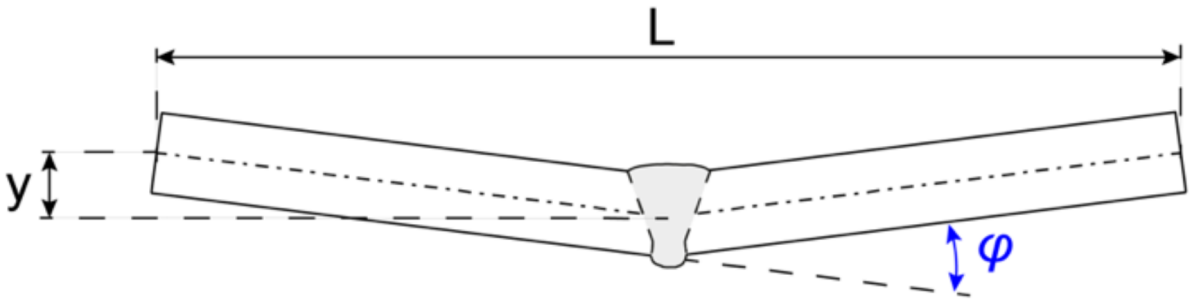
Angular misalignment of the welded specimens taken from [6]
